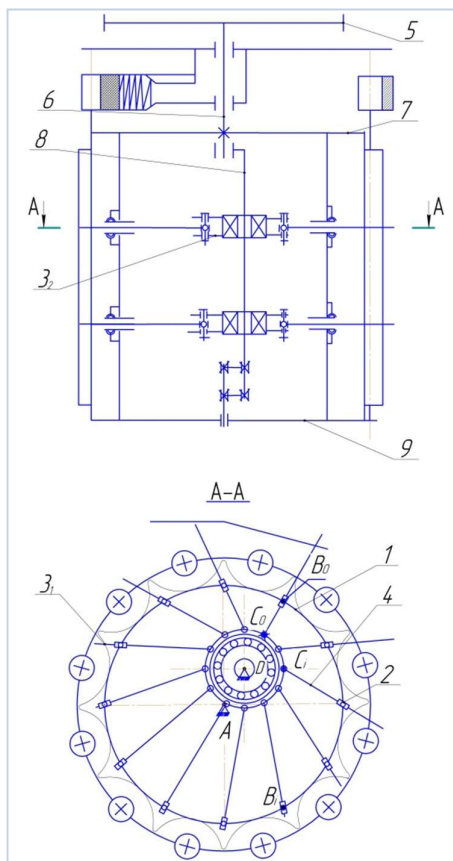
principle diagram of a spindle drum with multiloop coulisse mechanism.
